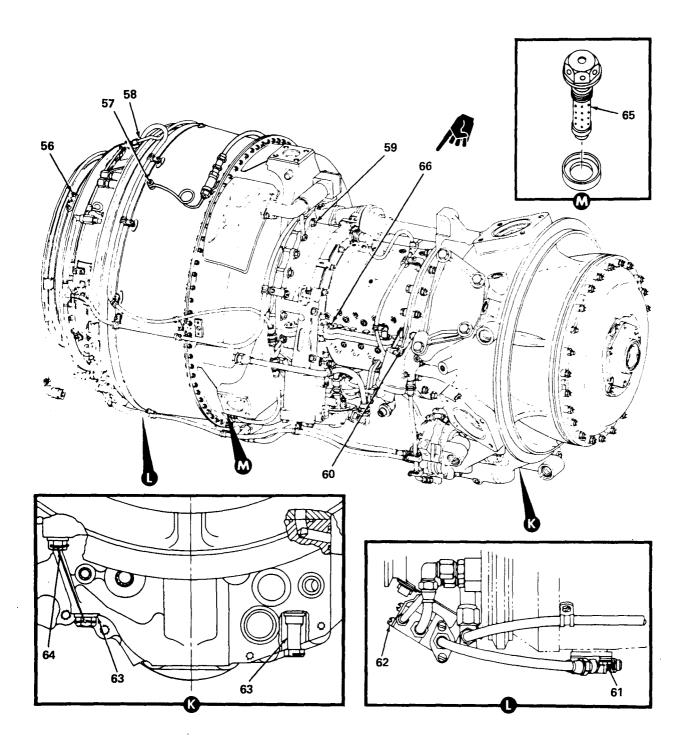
Special Torque Value Locations (T53-L-13B/703 Engines) (Sheet 5 of 5)
